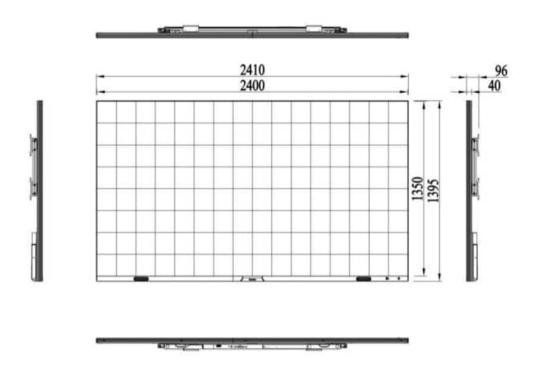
The dimensional drawing of non-touch version wall mounting X108
